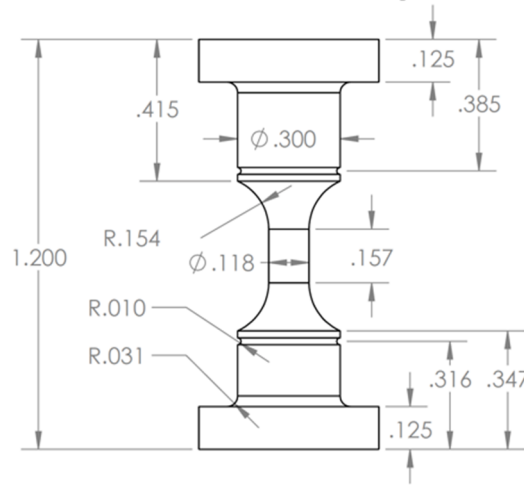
SAE dimensions of the PNNL 1.2" tall SCC tensile initiation specimen.
